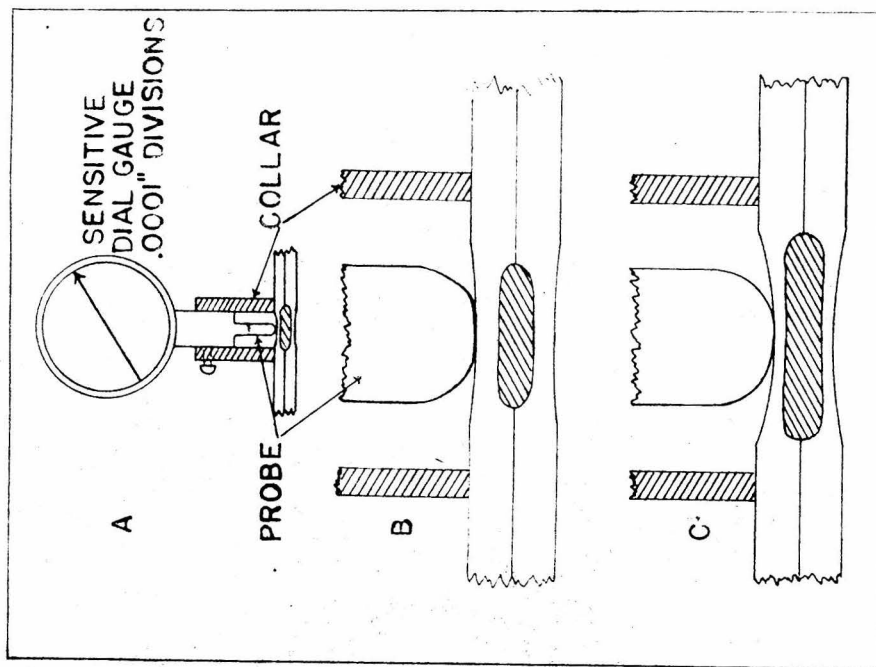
ELECTRODE INDENTATION OF WELDED SHEET TEST OF SPOTWELD SIZE AND STRENGTH.
